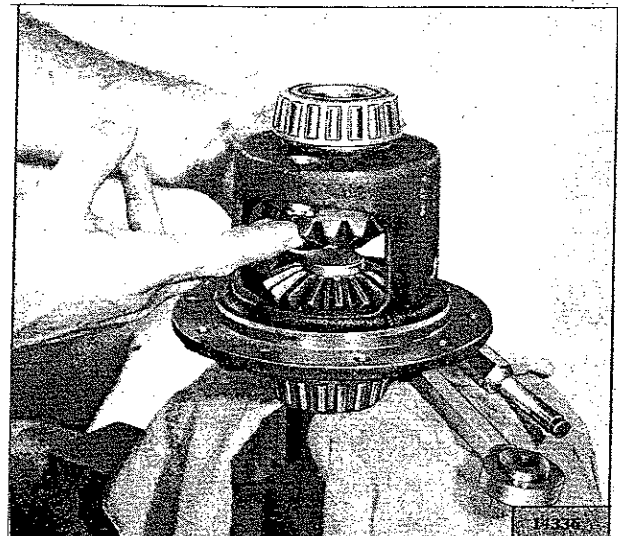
INSTALLING CLUTCH PACK AND SIDE GEAR
